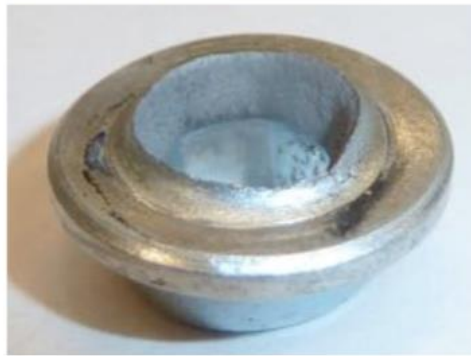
overload of bolt No. 1; ductile shearing off of the head
